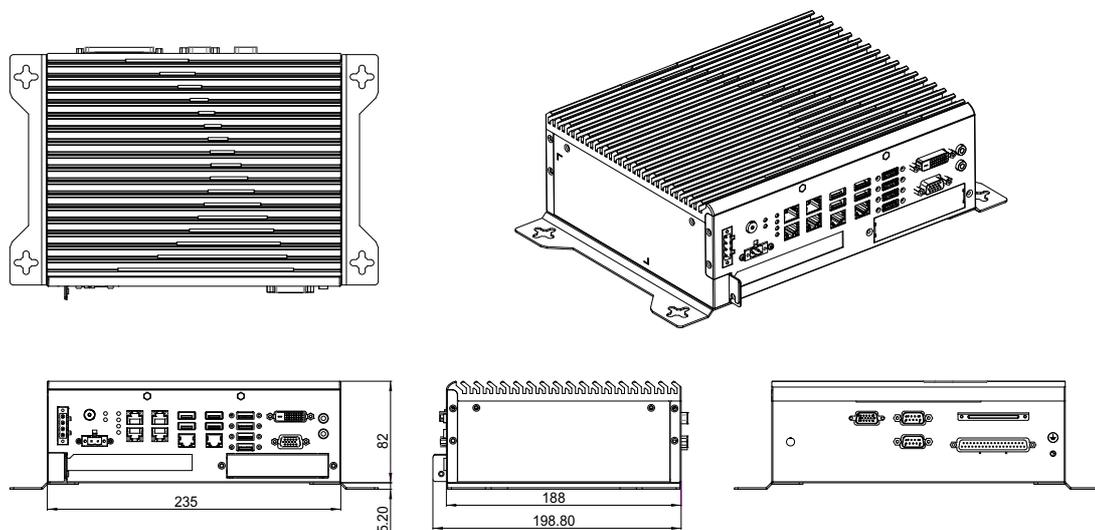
AIIS-5410P Mechanical Dimension Drawing
